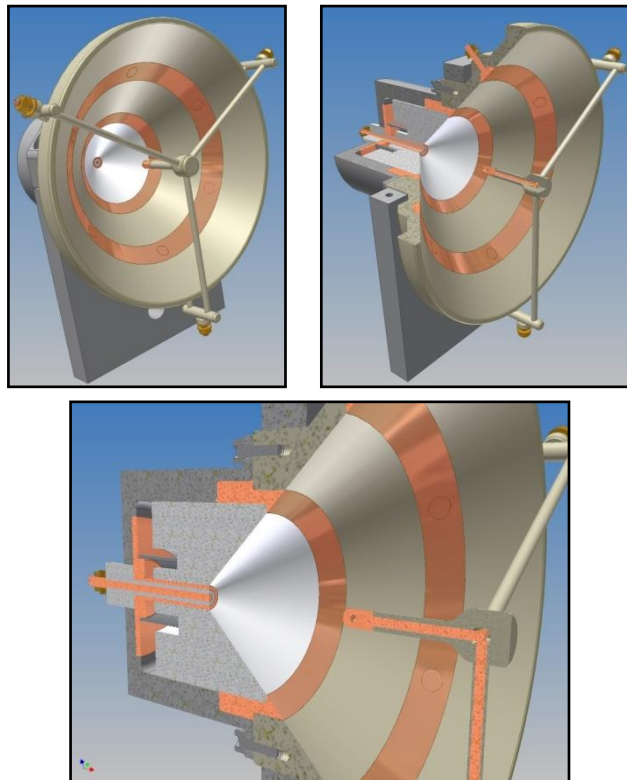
HFB-PPT Coaxial design. Perspective and cut views.
